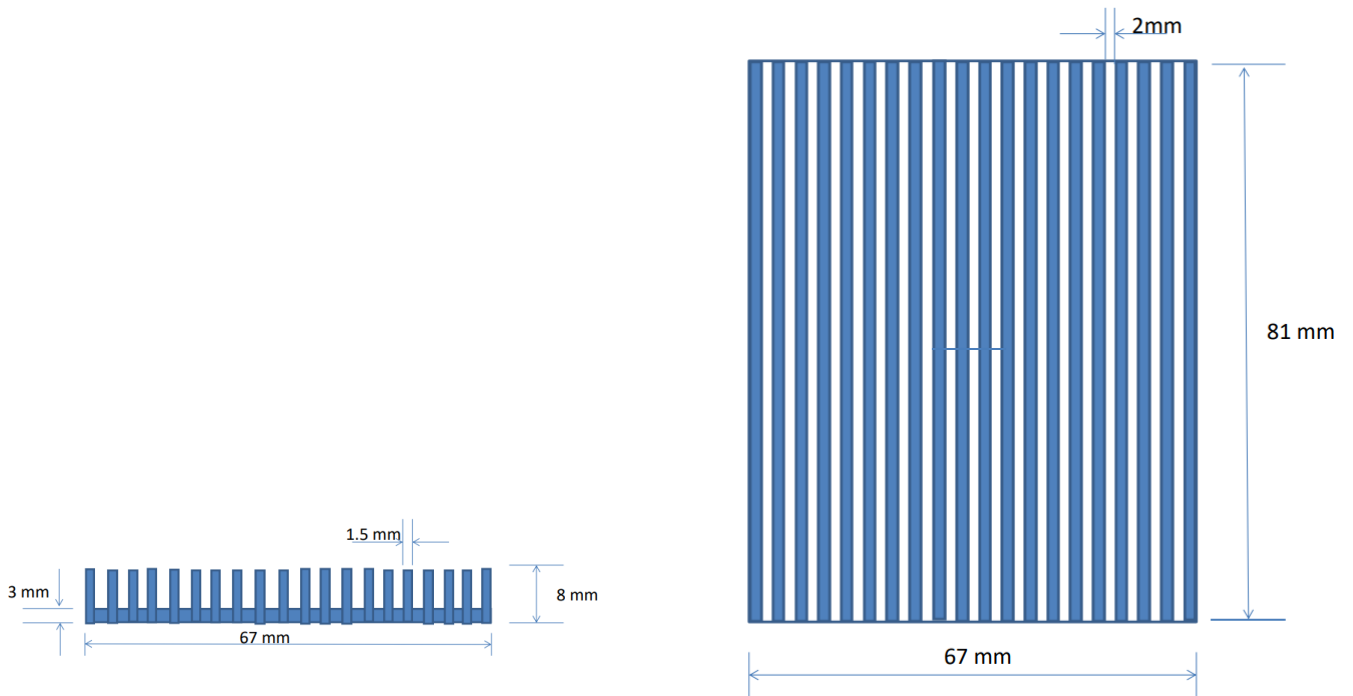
, The Dimensions of Classic heat sink (after cutting).
